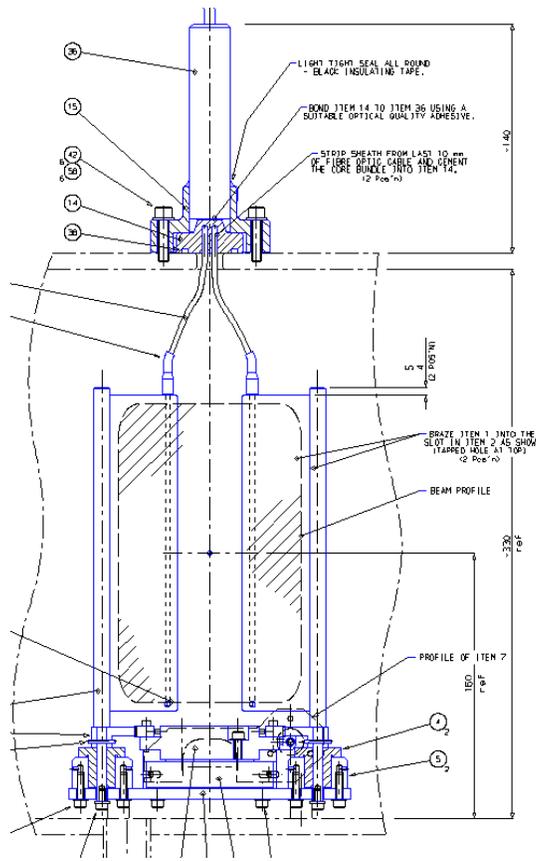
Drawing of the ISIS EC slit assembly, with scintillating fibres fixed to the edges of the slits.
